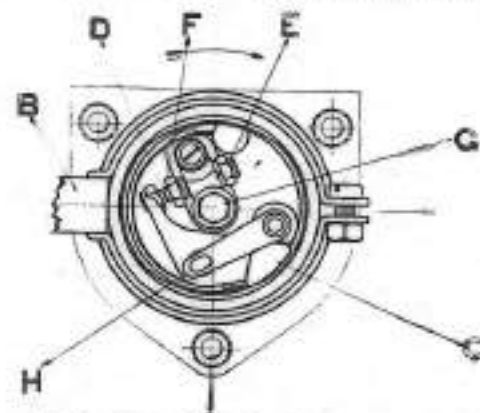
The contact breaker. The lettered parts are referred to in the text by name.
